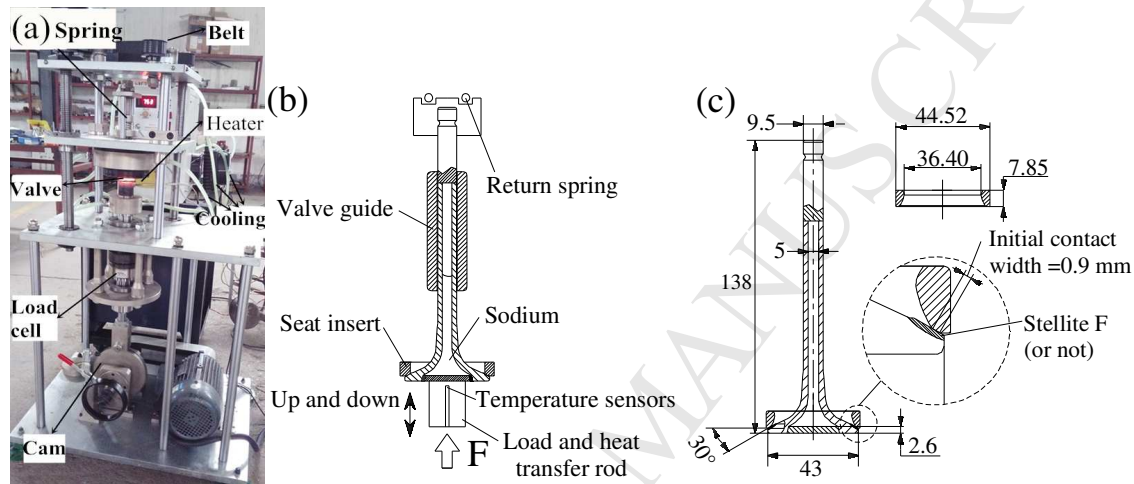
(a) The designed apparatus [1]; (b) durability test schematic; (c) specimen geometry.
